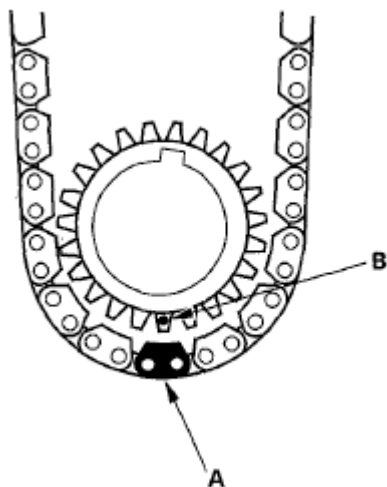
Identifying TDC Mark On Crankshaft Sprocket
